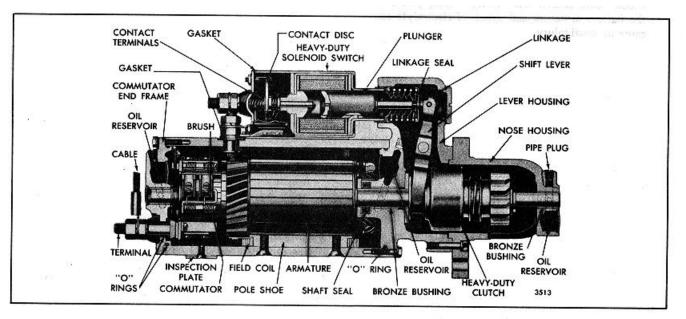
Cross-section of Starting Motor with Sprag Heavy-Duty Clutch Drive.
